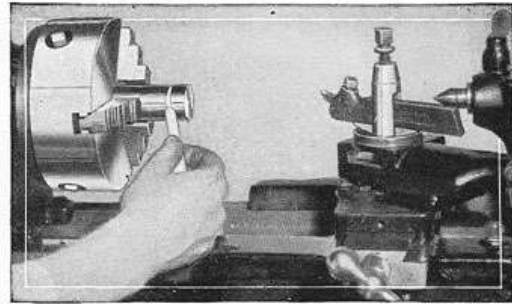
Truing Up Rough Stock in Lathe Chuck.
